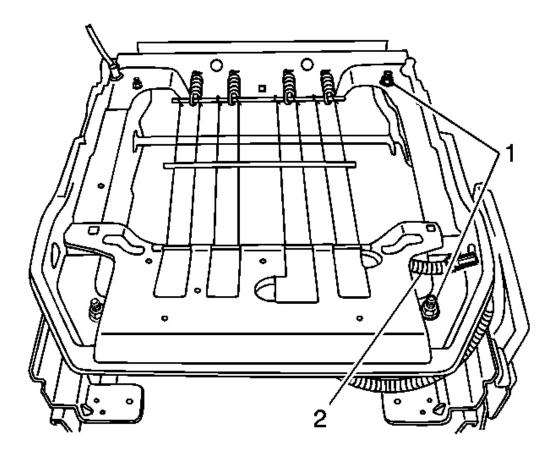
View Of Wire Harness & Seat Cushion Frame Nuts Courtesy of GENERAL MOTORS CORP.
